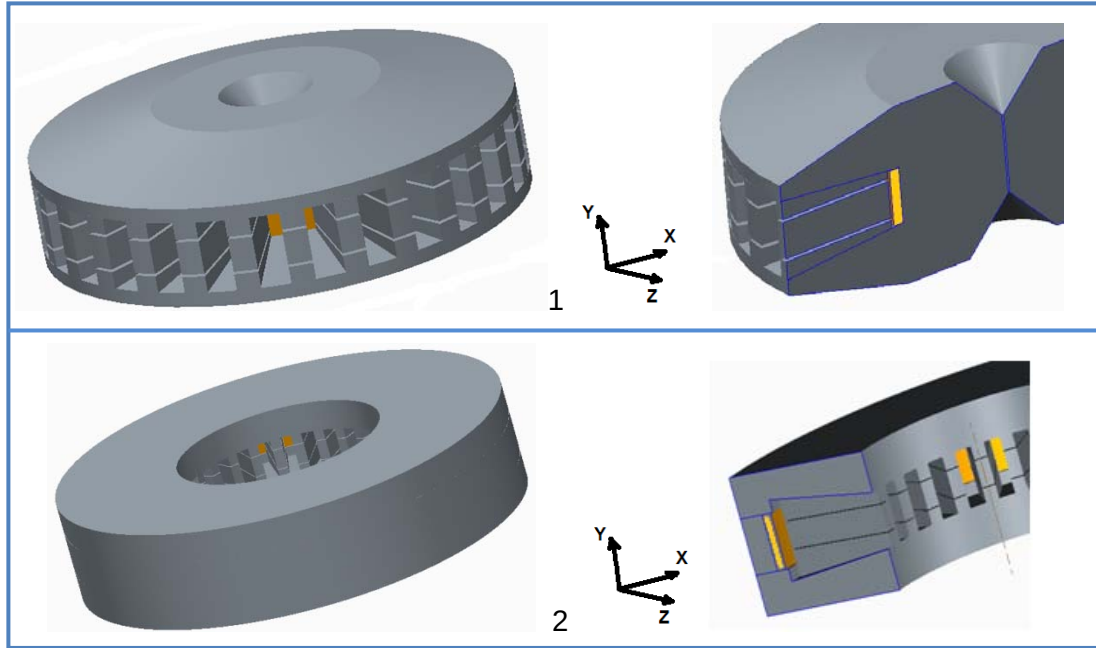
SR Machine Coil at IR (Top) and Coil at OR (Bottom)
